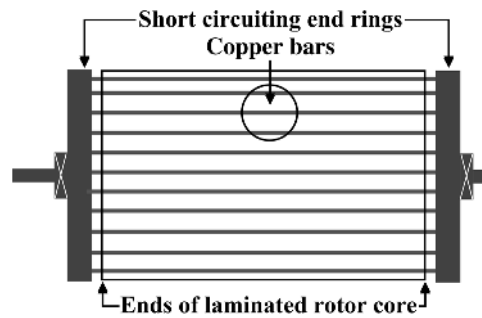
Schematic illustration of a squirrel cage copper or aluminum fabricated winding.
